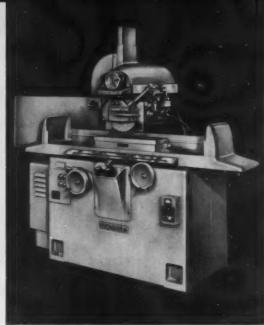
A Thompson surface grinder which has a cross-feeding wheel-head
